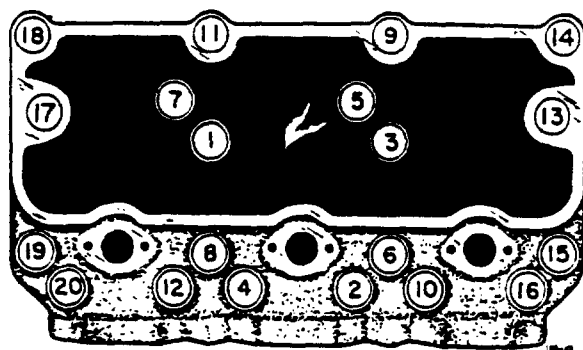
117. Cylinder Head Stud Nut Tightening Sequence
